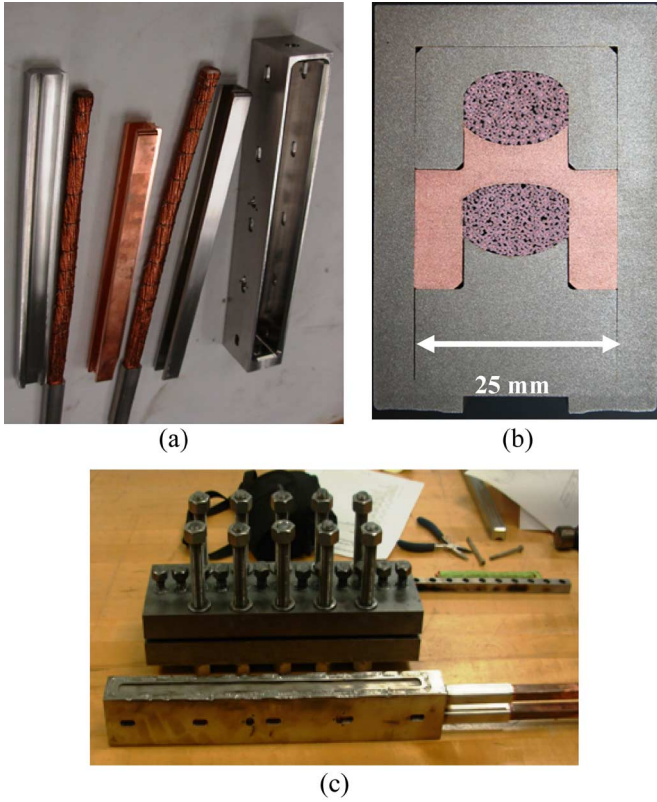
FSJ-A sample joint. (a) FSJ-A joint parts; (b) joint cross-section view; (c) joint compress tooling.
